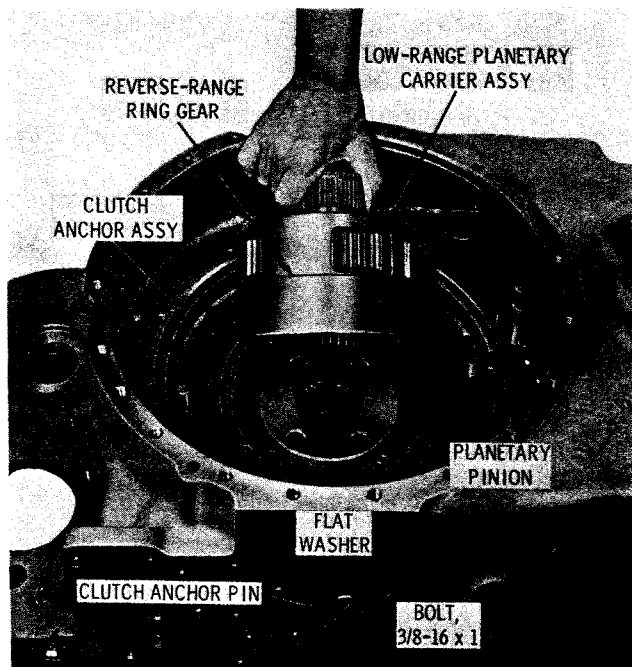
Installing low-range planetary carrier assembly with reverse ring gear
